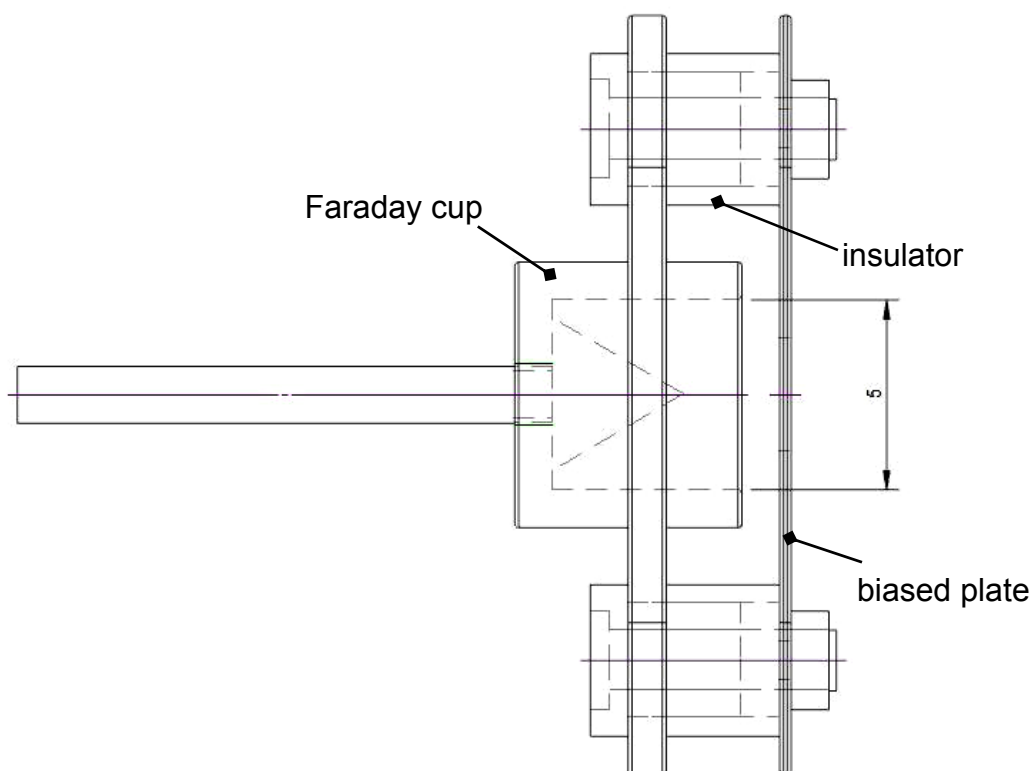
The cross-sectional view of the designed Faraday cup mounted on the EVA 2000 sample stage. (dimension shown in mm)
